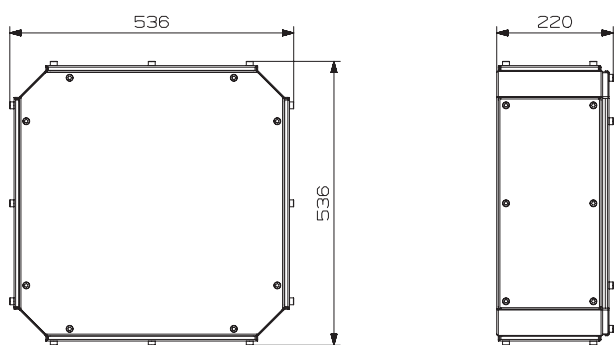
Motor size 250, with larger than standard terminal box (variant code 019), with 21 terminals
